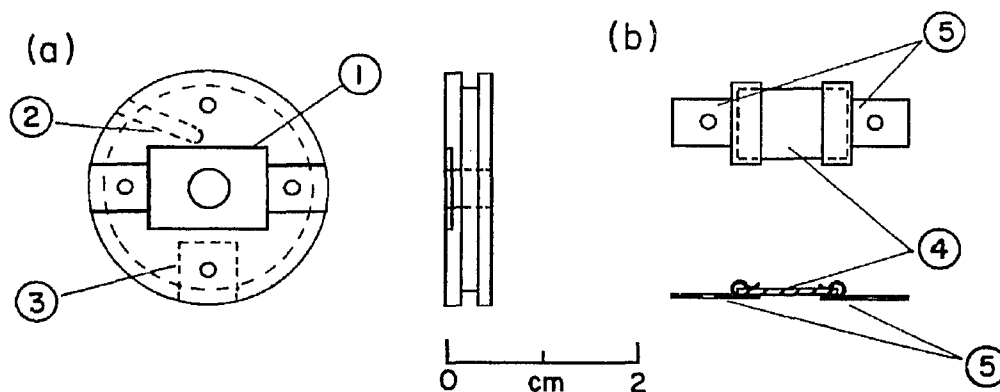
(a) Front and bottom views of sapphire mounting block for GaAs crystal showing (1) milled slot for crystal, (2) channel for platinum thermometer (not used), and (3) machined step and hole for mechanical support. (b) Front and side views of clamp assembly showing (4) GaAs crystal and (5) tantalum clamps.
